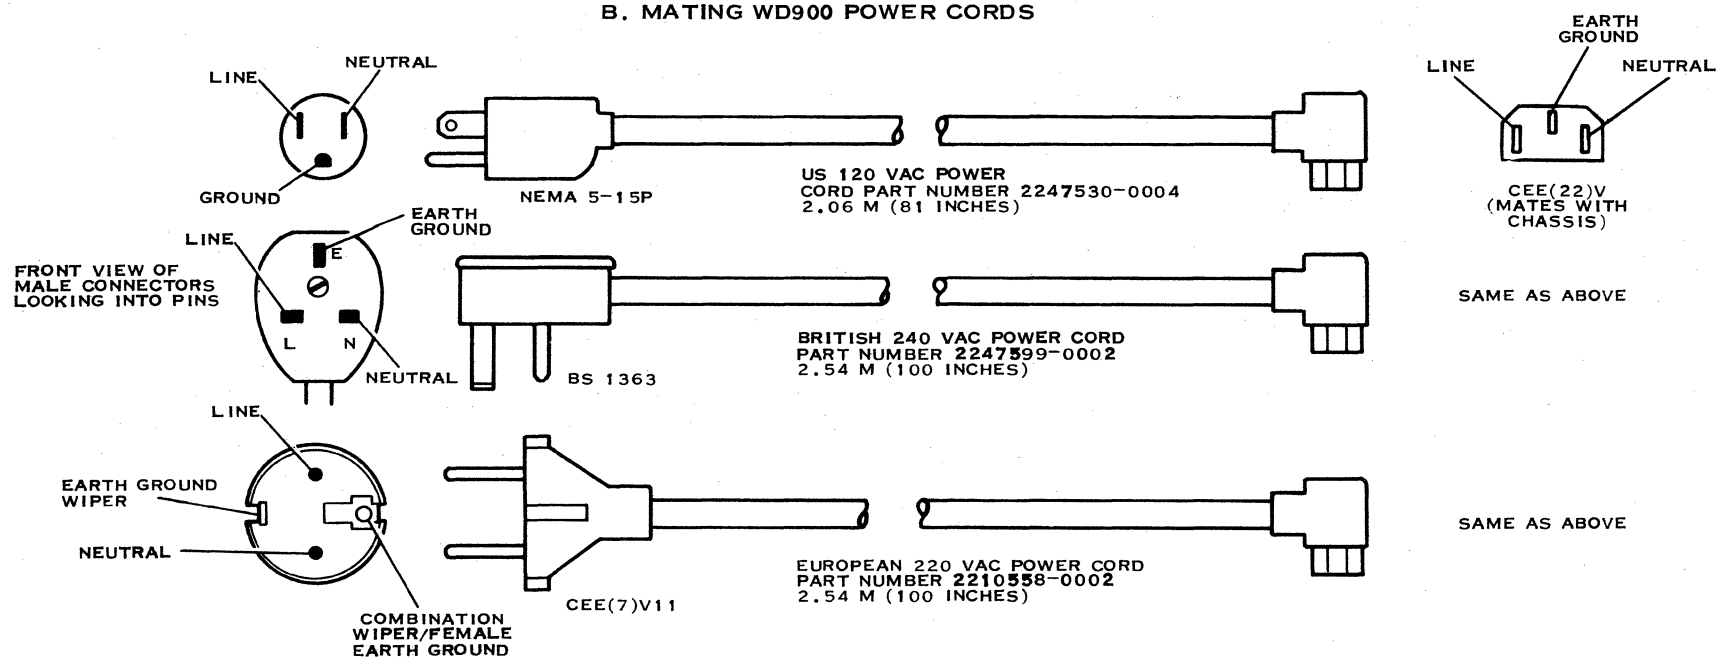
AC Power Cables (Sheet 1 of 2)
